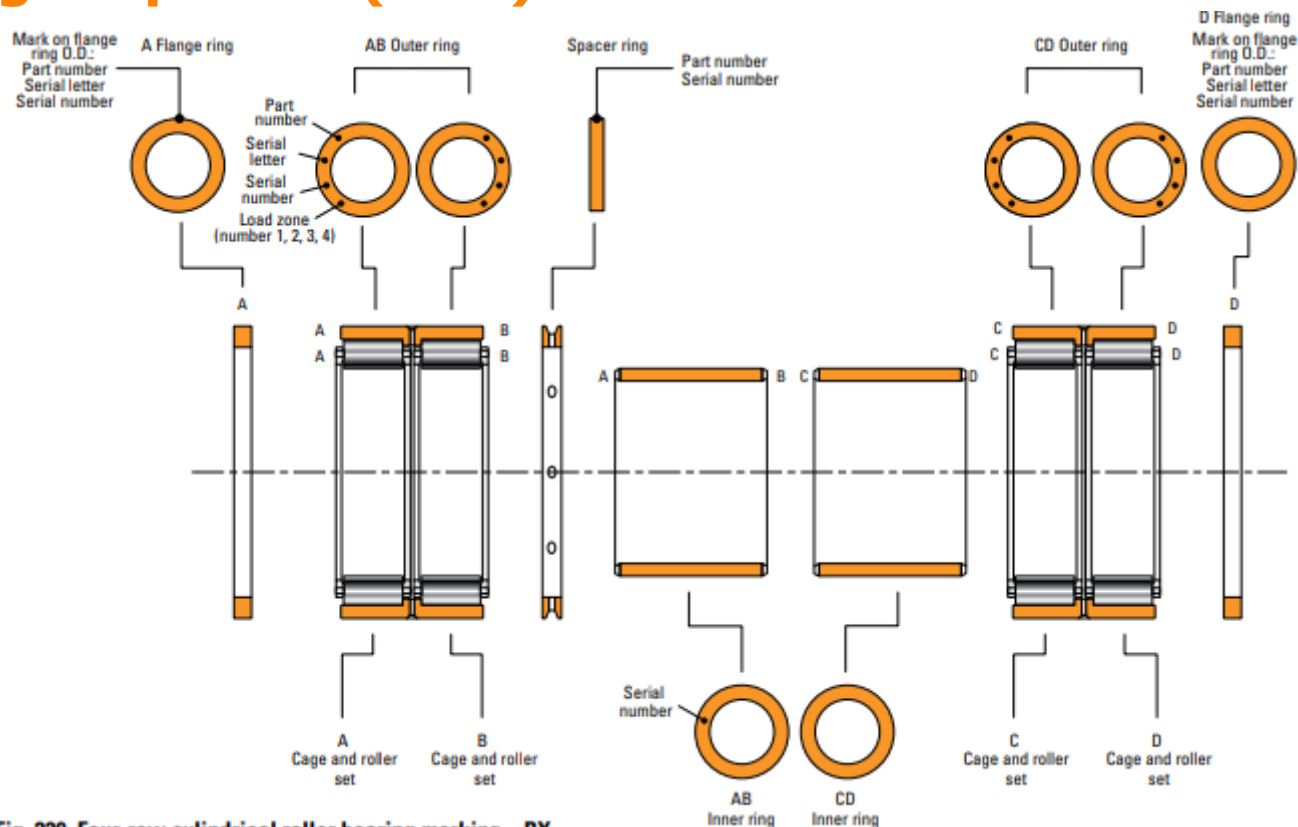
Four-row cylindrical roller bearing marking – RX.
